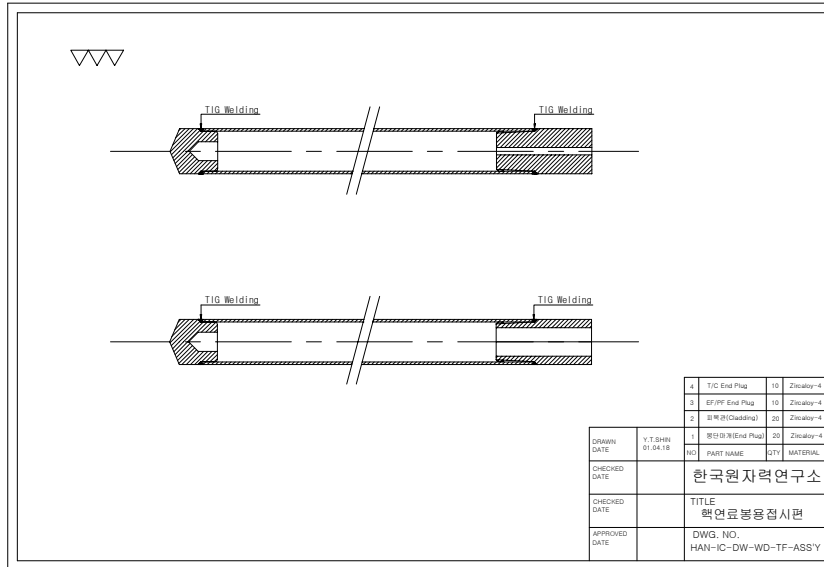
The Drawing of Joint Geometry for End Plug Welding
